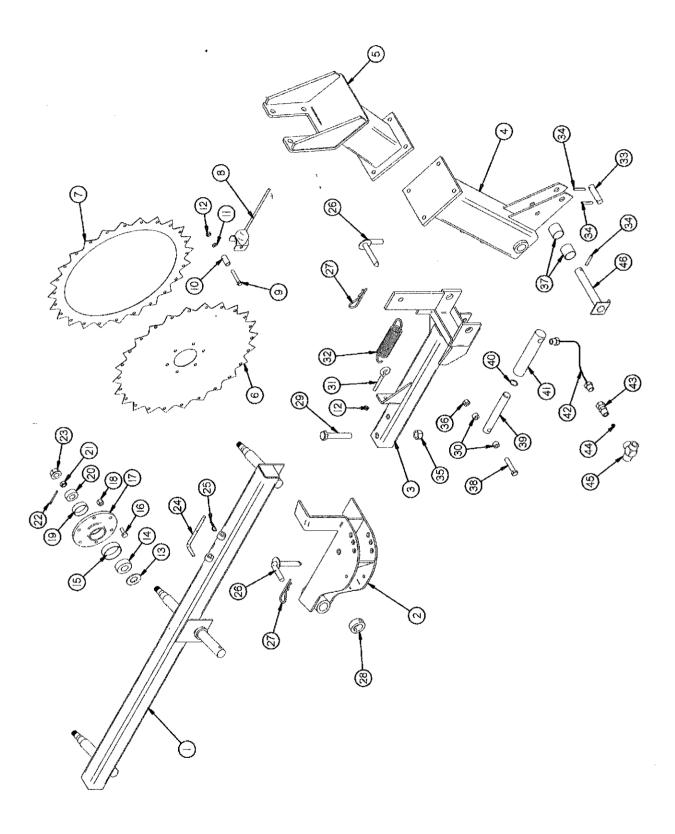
1460-1660 HI-CAPACITY RAKE OPTIONAL 3-WHEEL KICKER WHEEL
